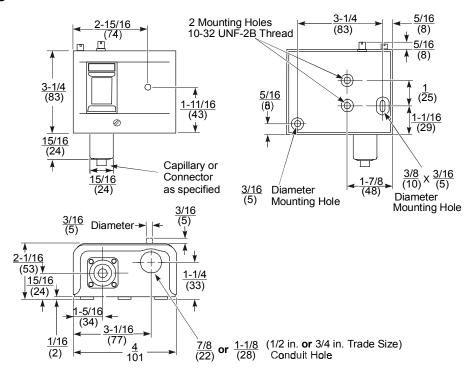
Dimensions for High Pressure Controls with NEMA 1 Enclosure, in. (mm)
